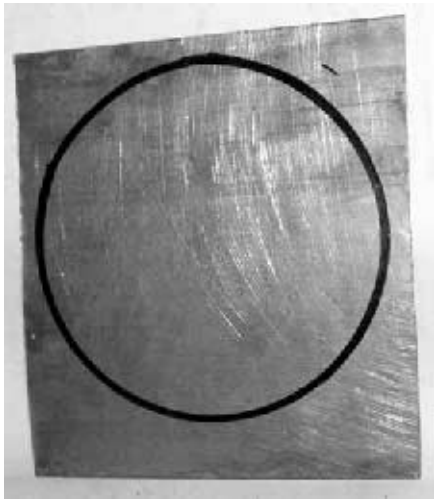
Using the cylinder end, scribe a circle onto the PC board.
